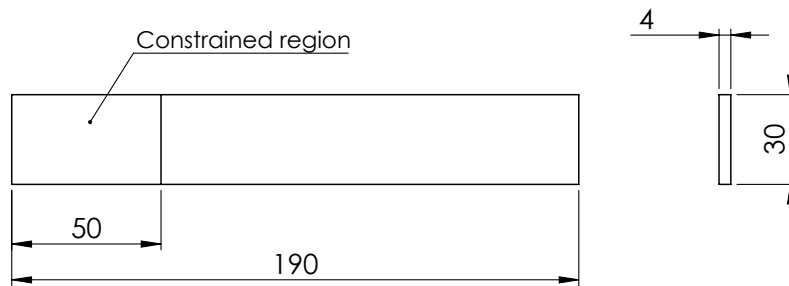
2D drawing and geometrical dimensions of simple bending/torsion and bending test specimens.
